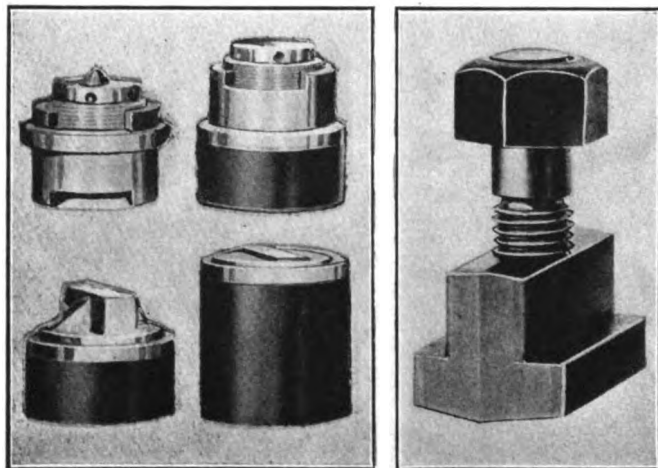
MARVIN & CASLER T-SLOT NUT, JACKS AND EXTENSION BLOCKS
